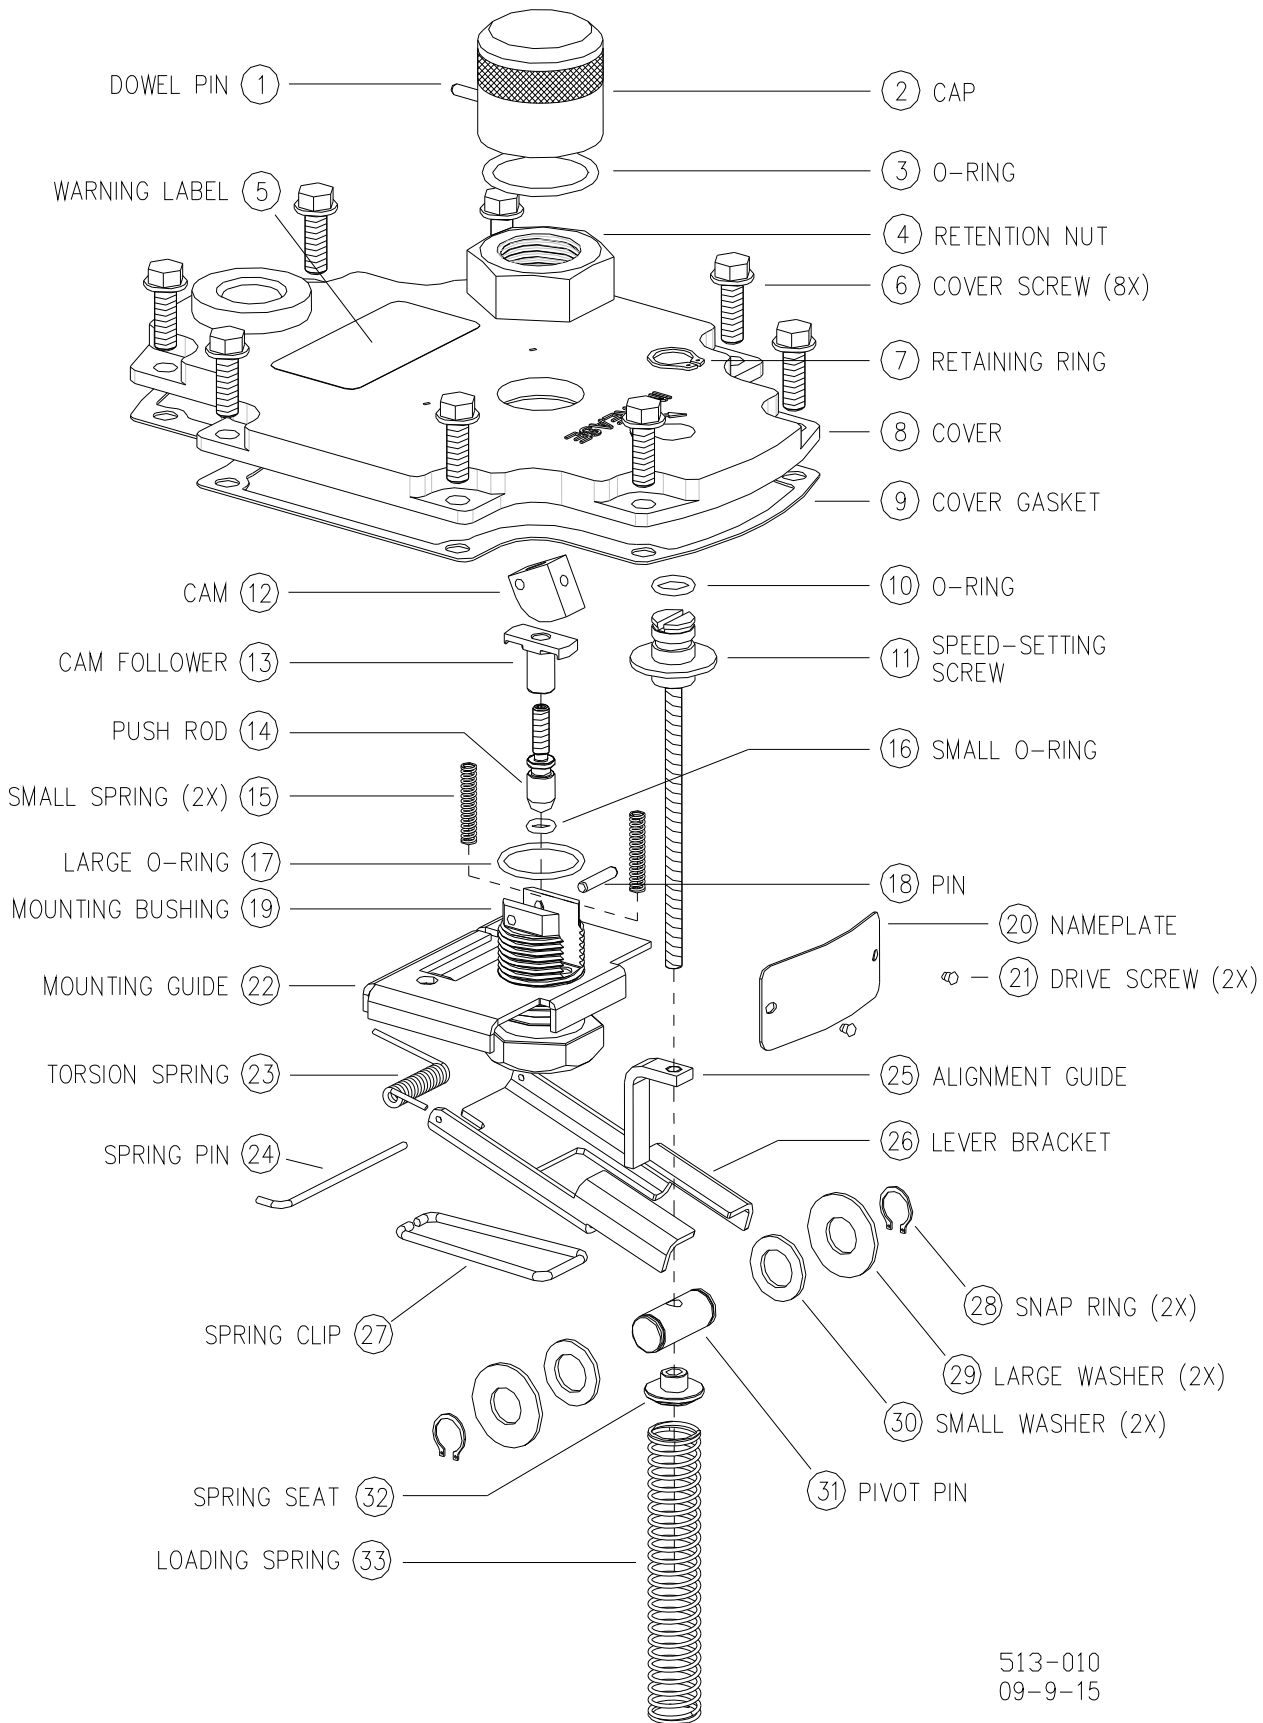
TG-13/-17 Exploded View (before installation of OTD)
